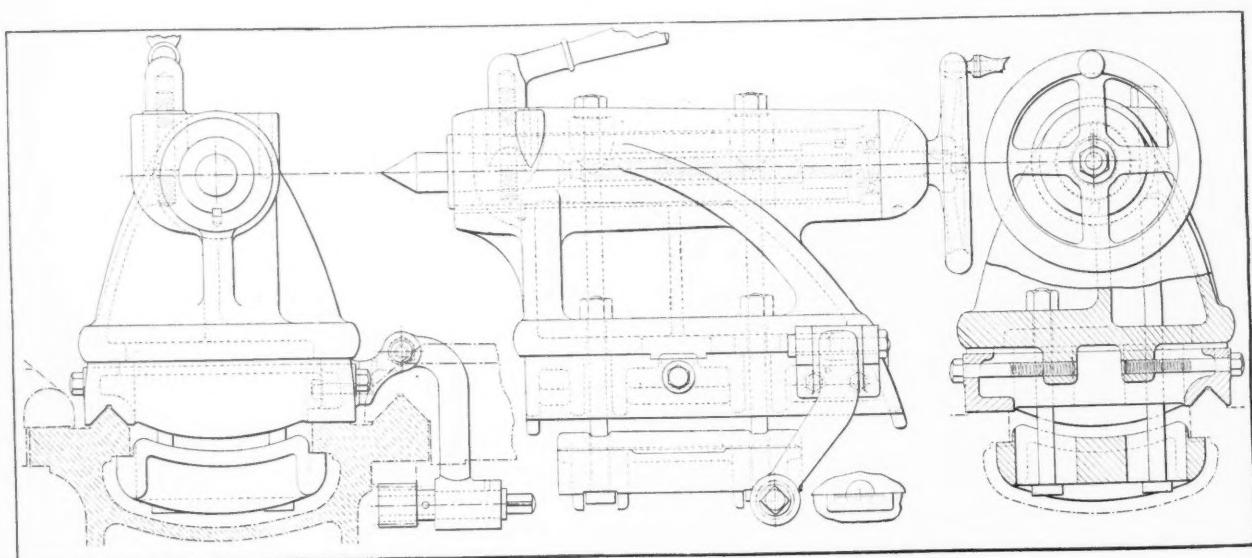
Tailstock with Rack Feed and Ball-thrust Bearing
